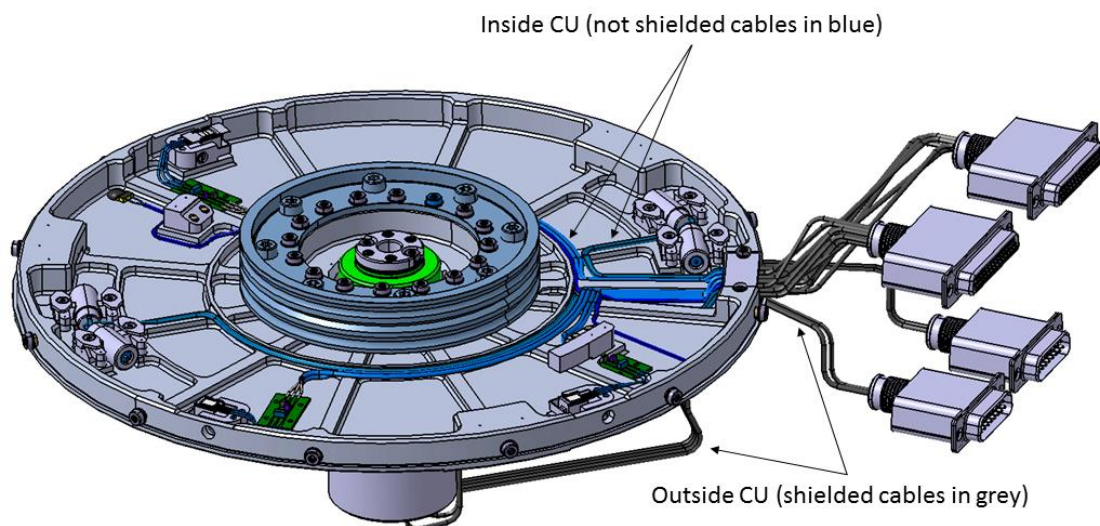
Harness Global view – Rotor assembly and Housing hidden
